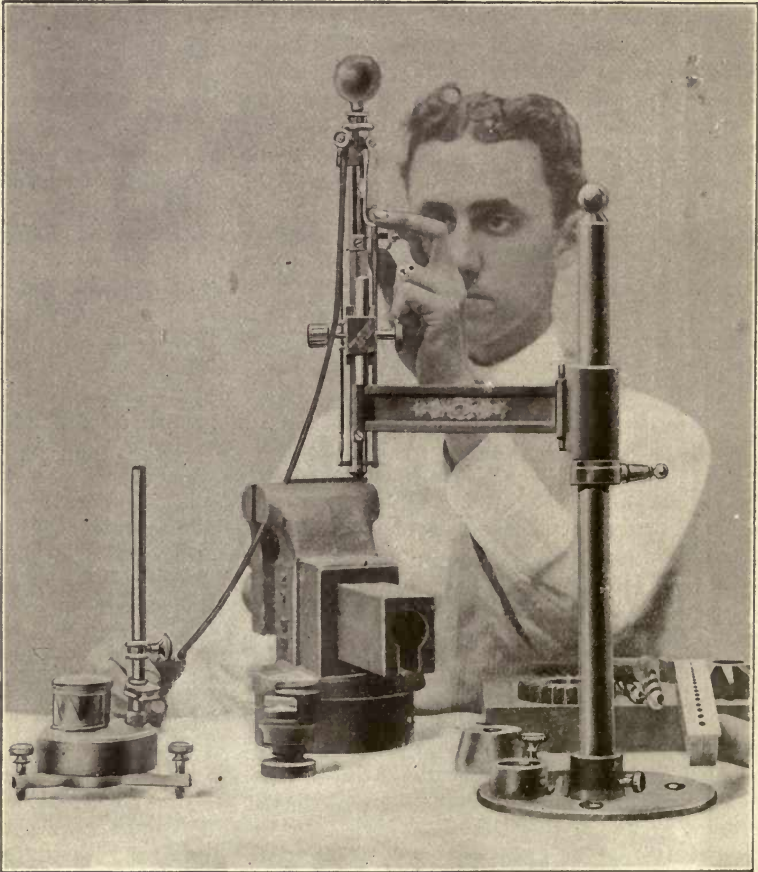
Scleroscope equipped with Swinging Arm for Testing Pieces clamped in Bench Vise
